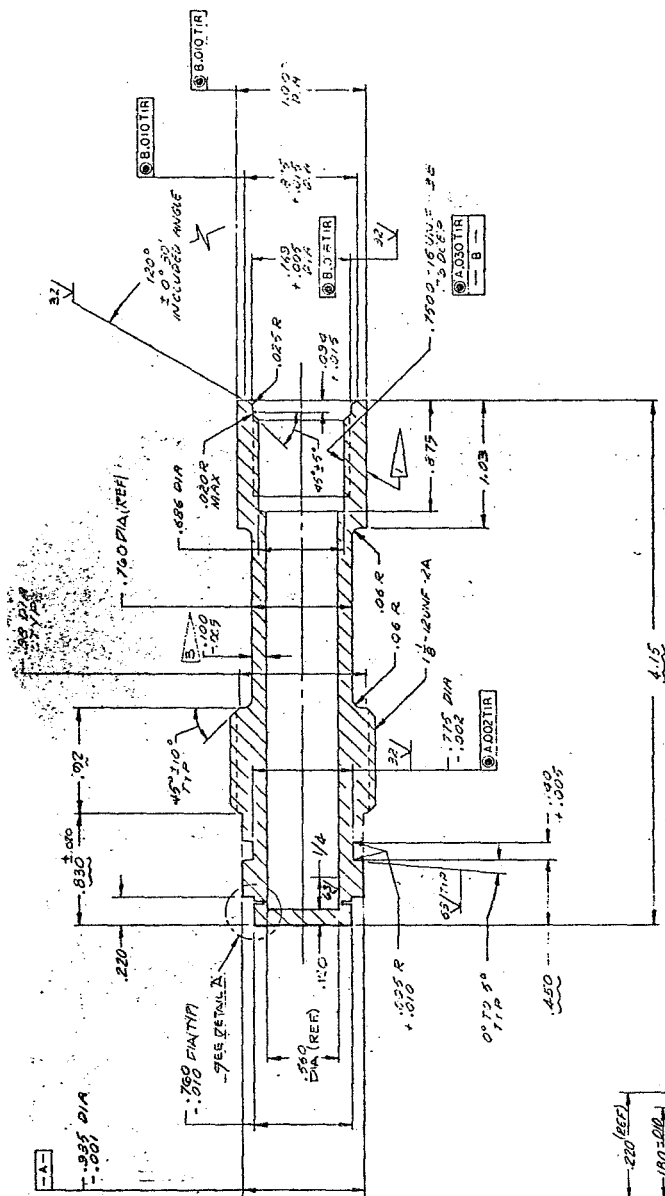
TEST ARRANGEMENTS, EXPLOSIVE VALVE NORMALLY CLOSED, PROTOTYPE .
